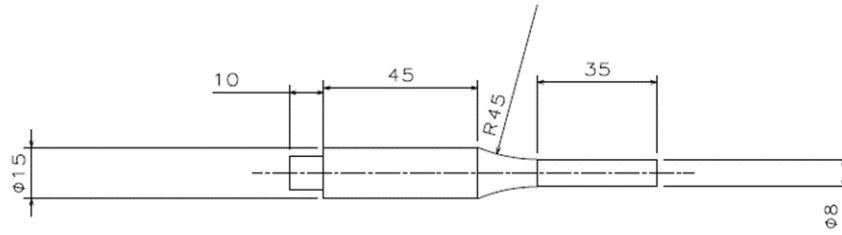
Cylindrical Roughness Measurement Specimen; Dimensions in mm.
